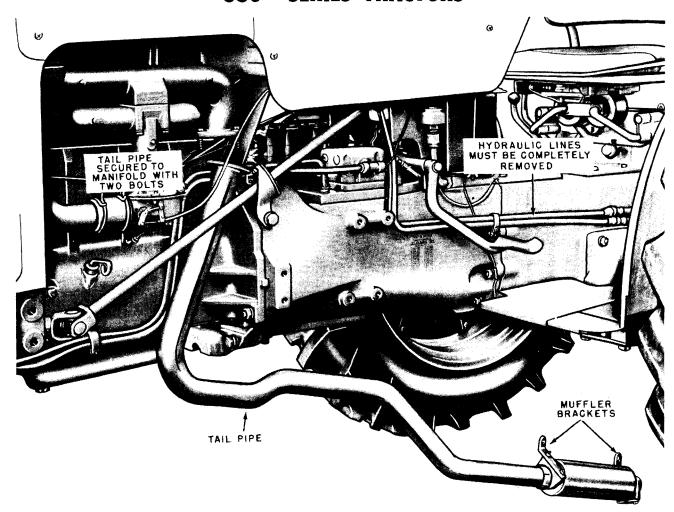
Underneath Muffler and Tail Pipe Assembly Being Removed
